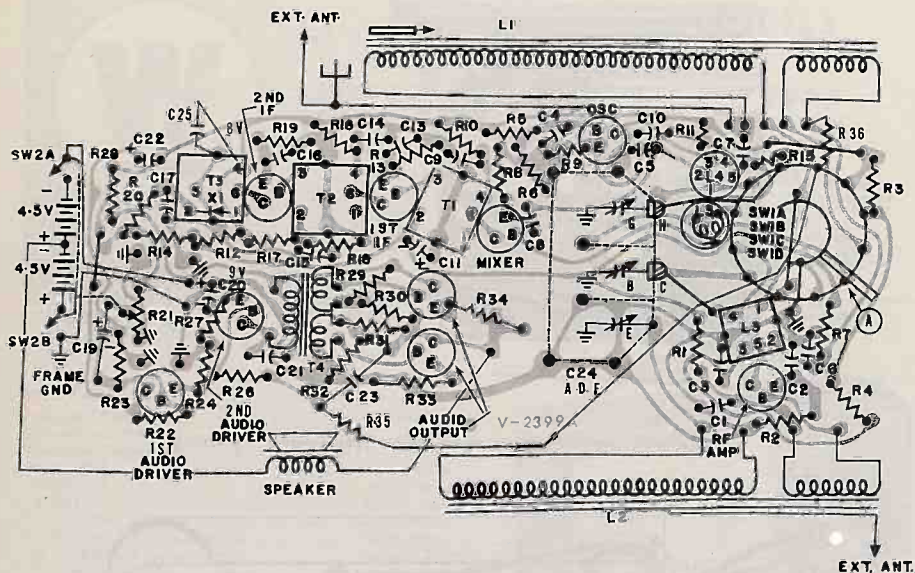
Bottom view of printed circuit chassis, showing components symbolically.
